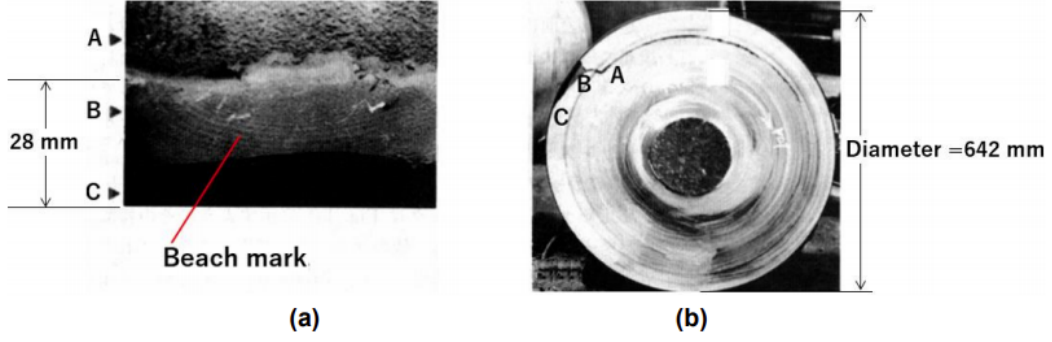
Failure at HSS/DCI boundary in bimetallic work roll (a) Fractured surface; A: Near boundary, B: Beach mark in shell, C: Roll surface, (b) Cross-section view of spalling crack
